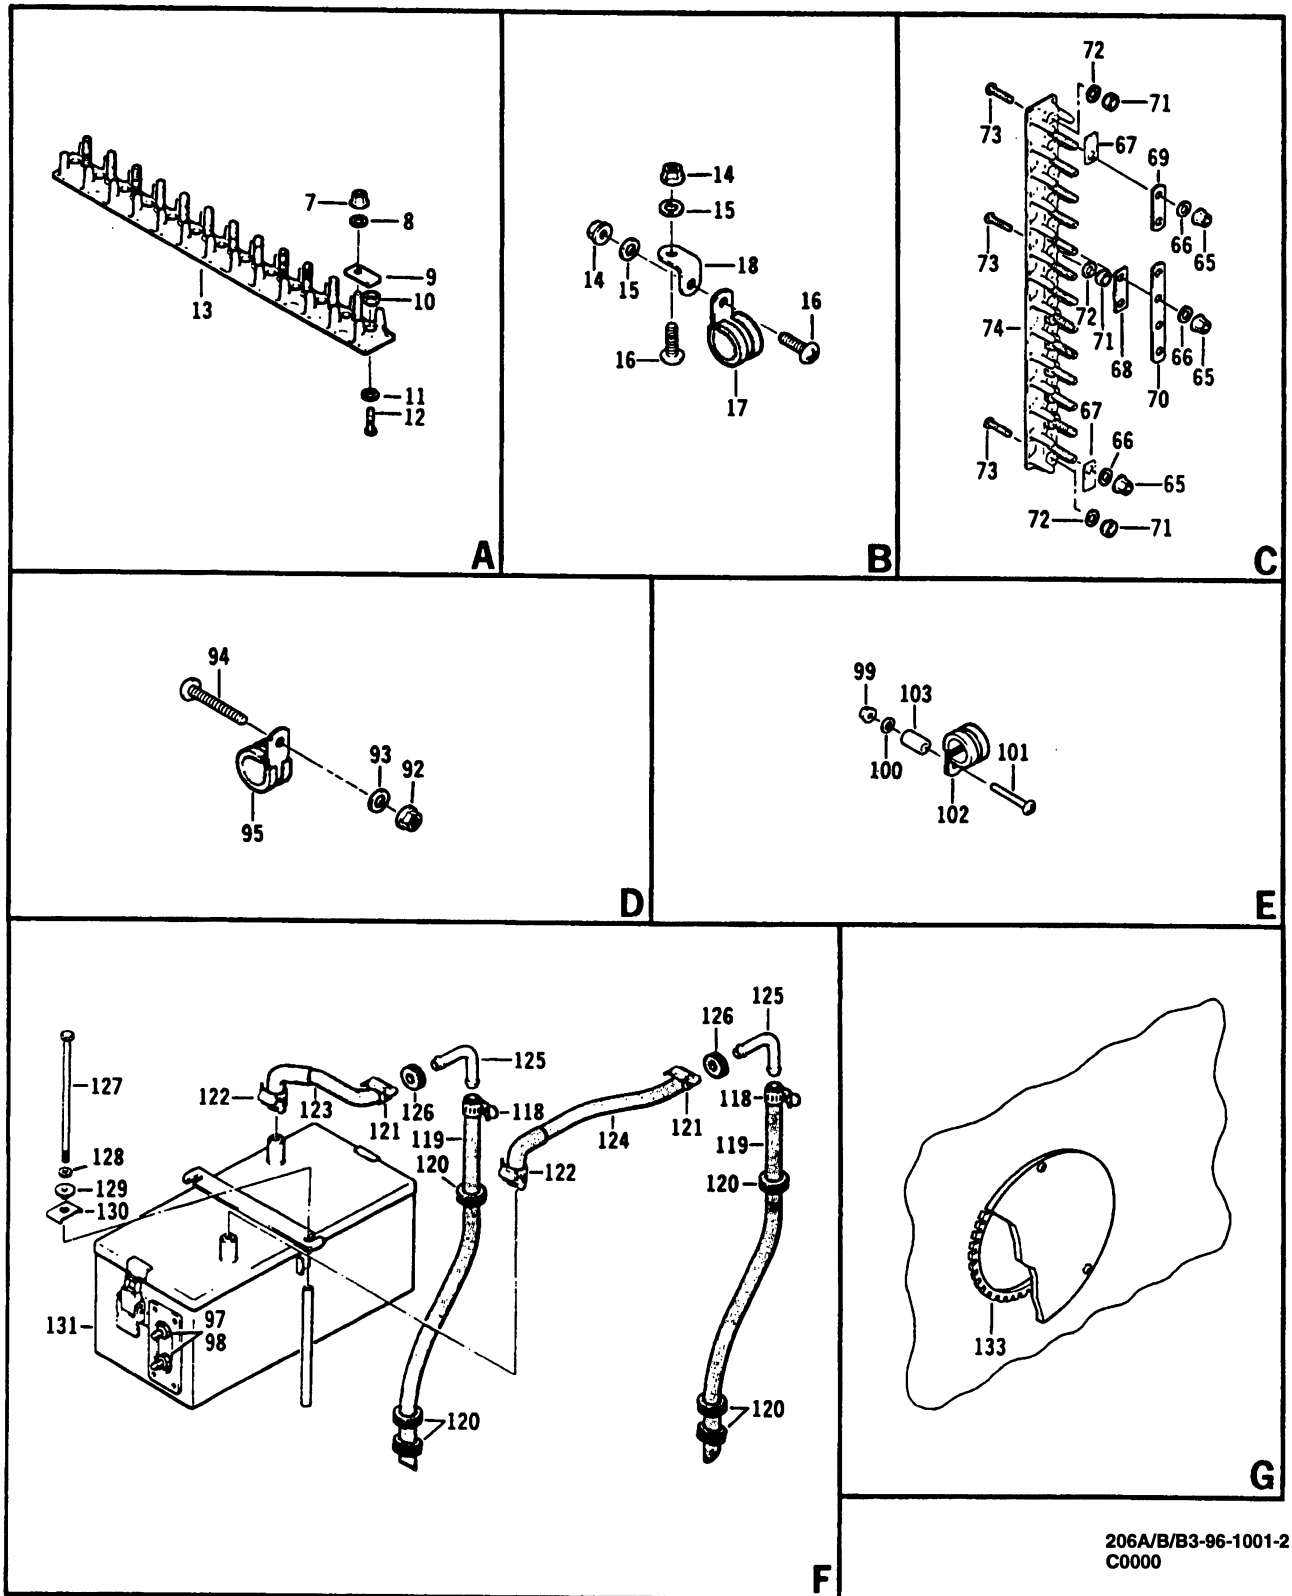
Electrical installation, cables and equipment (S/N 4 thru 153) (Sheet 1 of 2)
